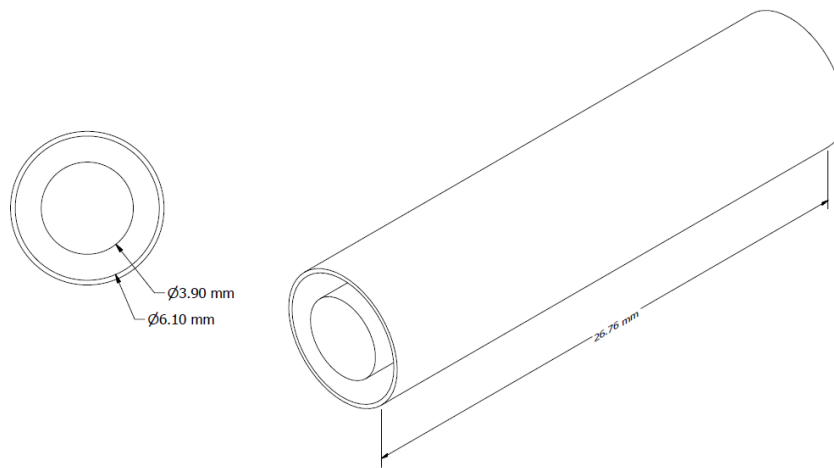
Dimensioned drawing of the co-axial transformer.
